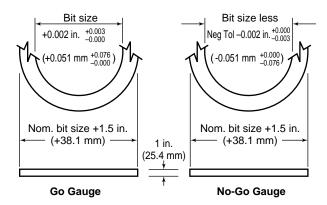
Diamond Bit and PDC Bit Gauge Dimensions
